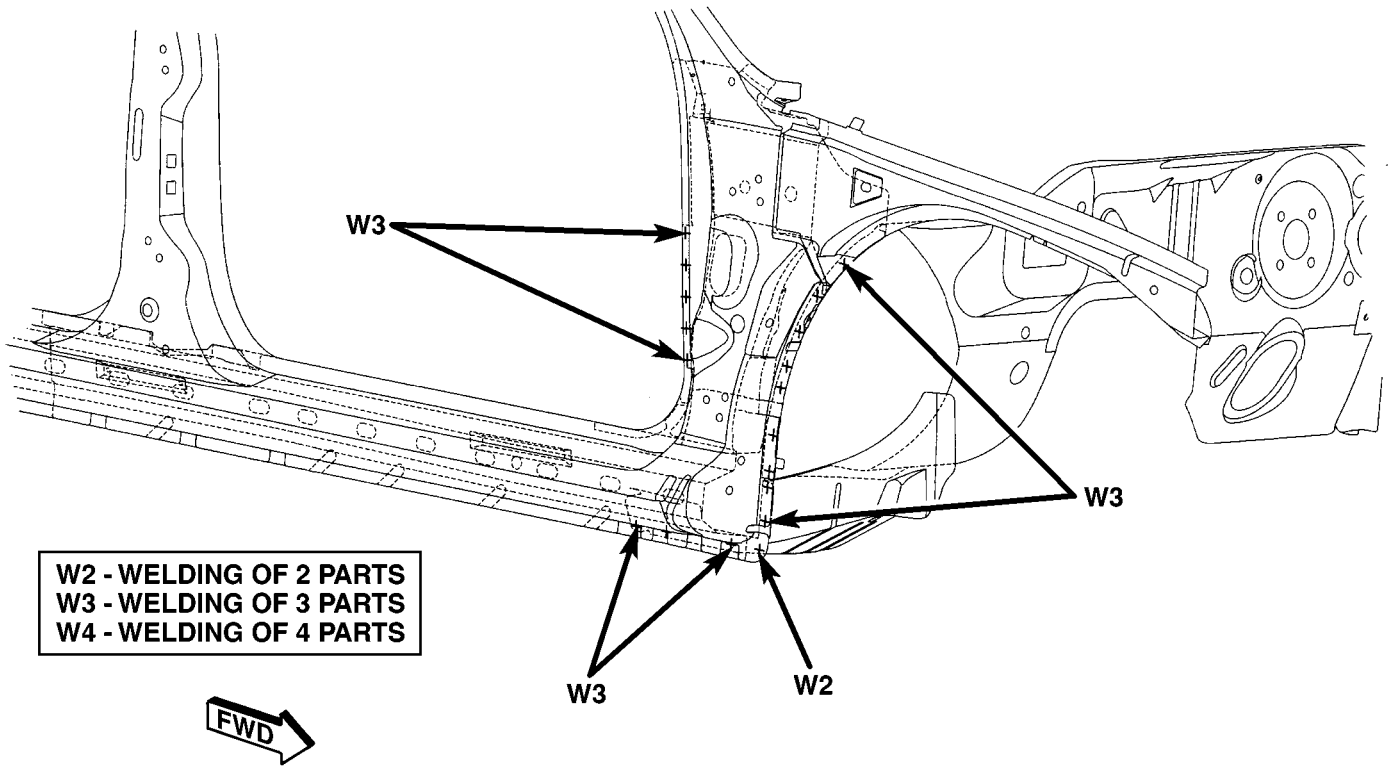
INNER BODY SIDE SILL TO COWL SIDE PANEL TO BODY SIDE APERTURE TO DASH PANEL
